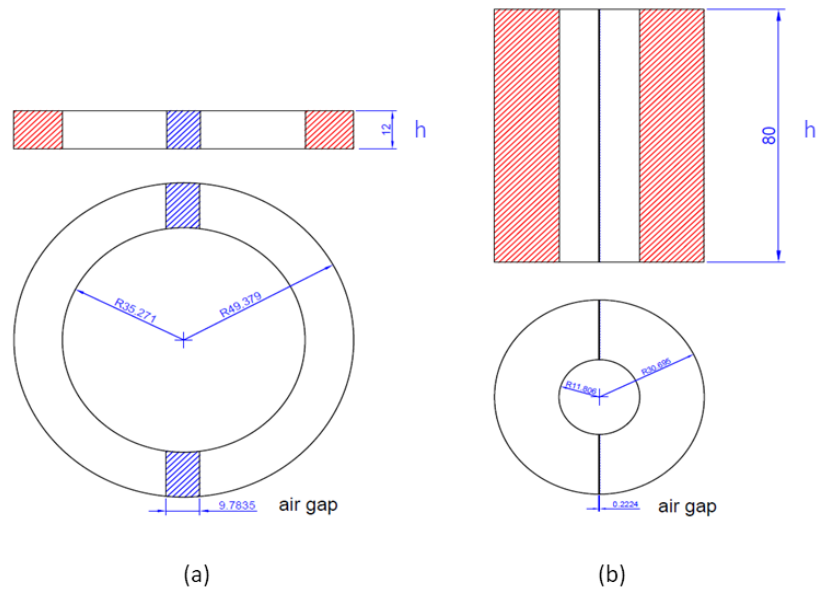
(a) Dimensions of Design 1, (b) Dimensions of Design 300
